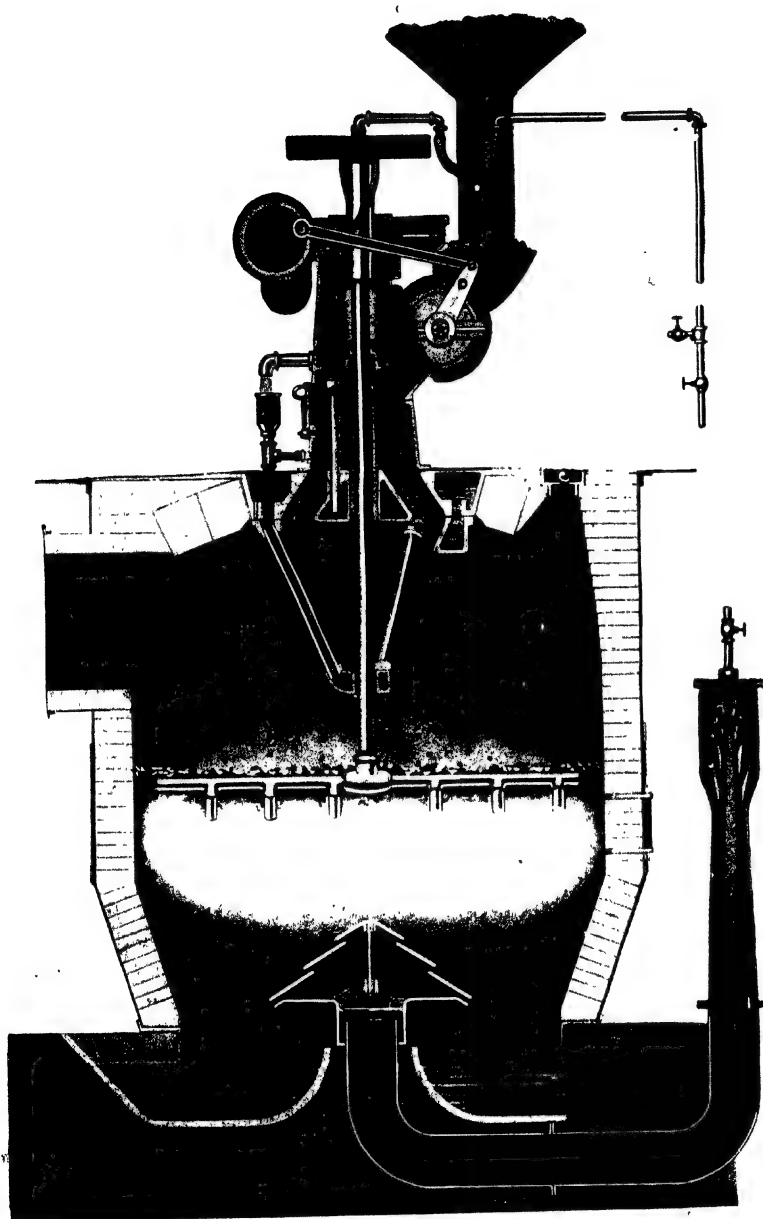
SECTIONAL ELEVATION OF CHAPMAN MECHANICAL PRODUCER.
